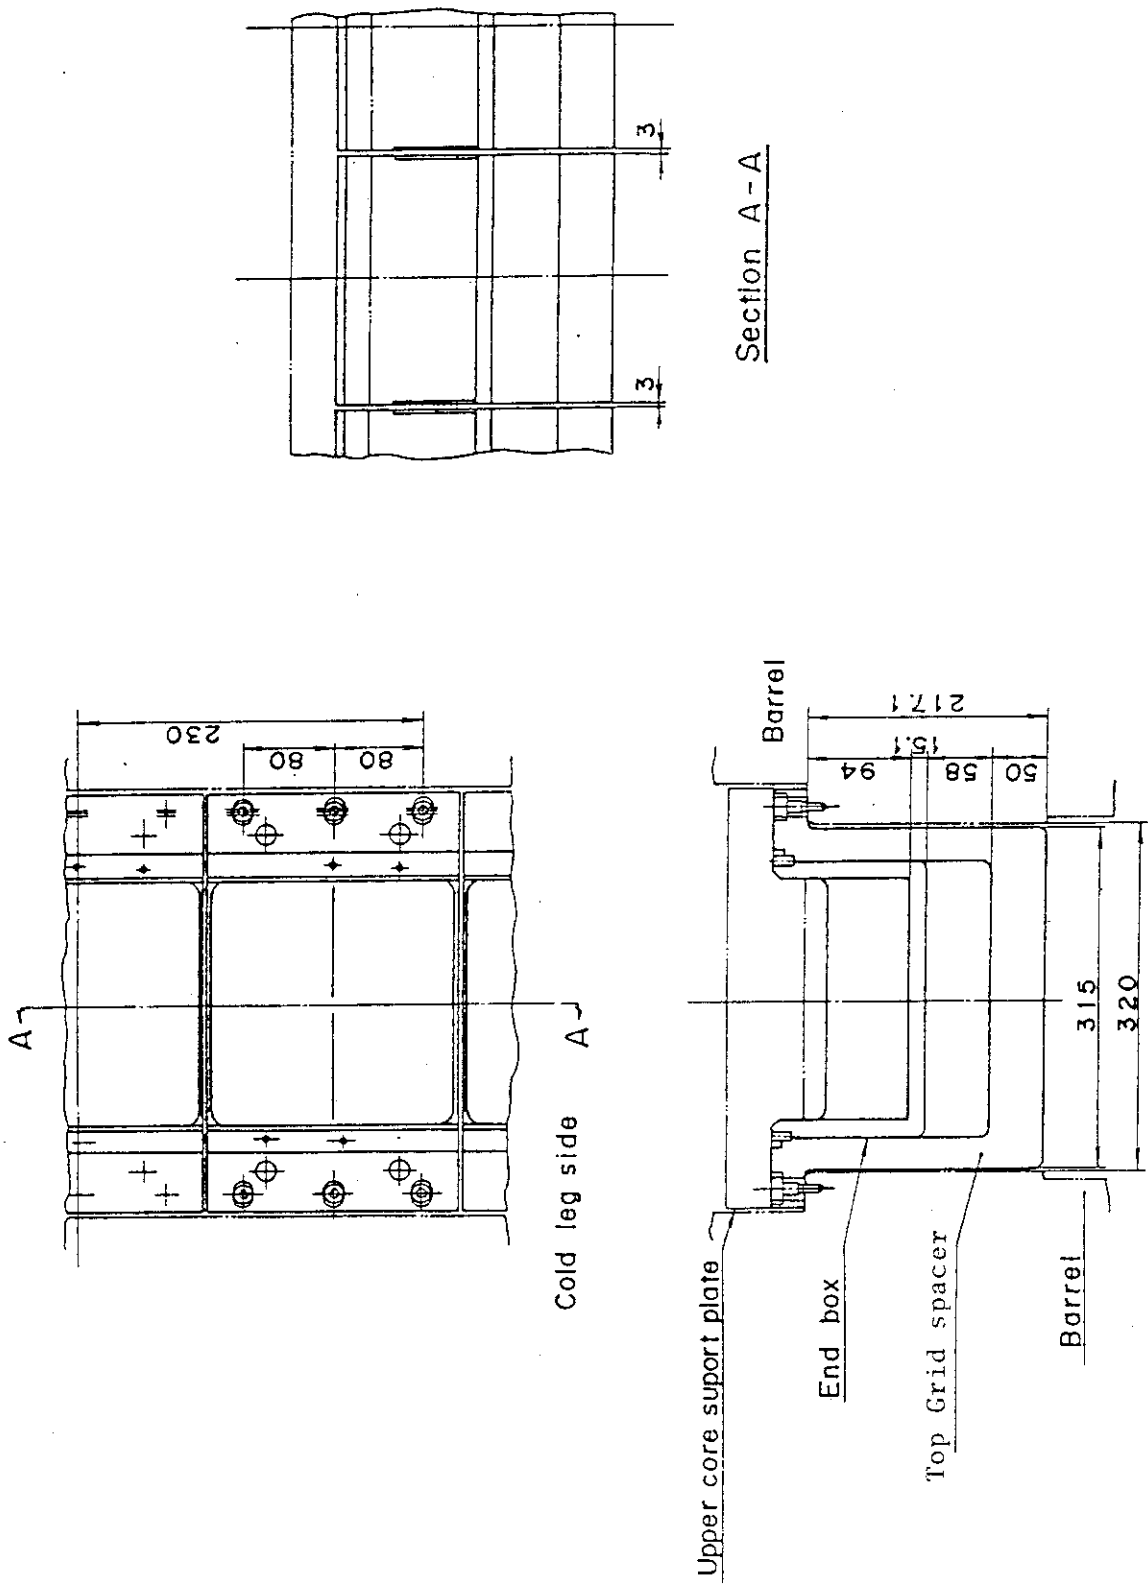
Arrangement and Principal Dimension of End Boxes and Top Grid Spacers
